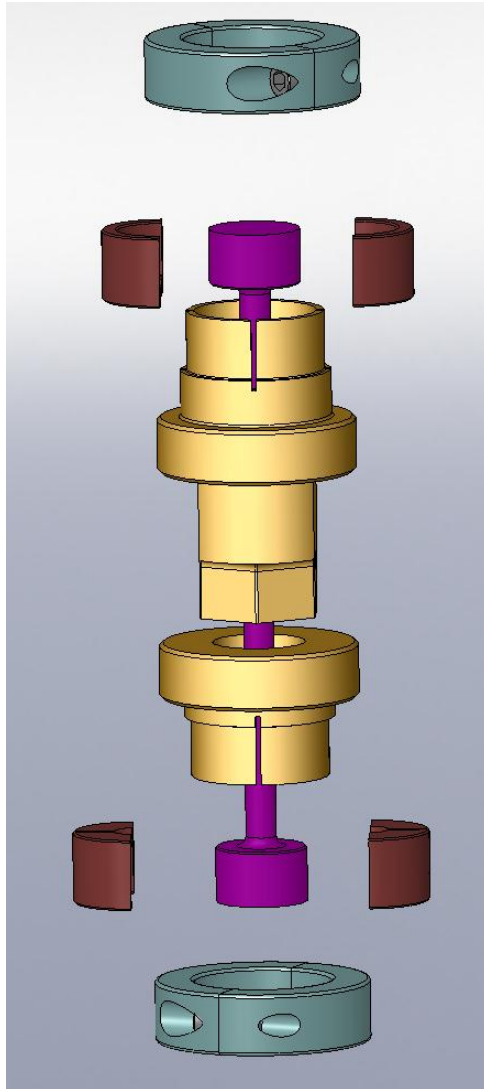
Exploded View of D0902104 Stage 1-2 Flexure Rod Assembly
